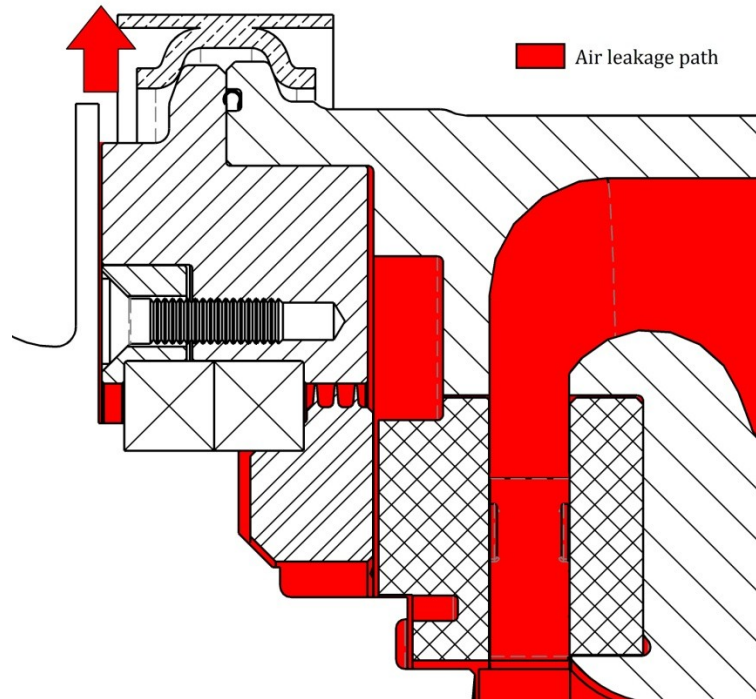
Air leakage path shown on the cross sectional drawing of the initial version of the gimbal bearings and retaining system assembly. The air leakage path through the gimbal system and the pressurized turbine volume are shown in red. A labyrinth seal has been placed in front of the gimbal bearings to minimize the leakage
